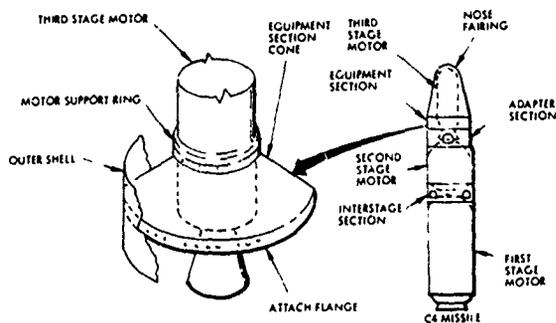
C4 Equipment Section Cone (Ref. 13)
